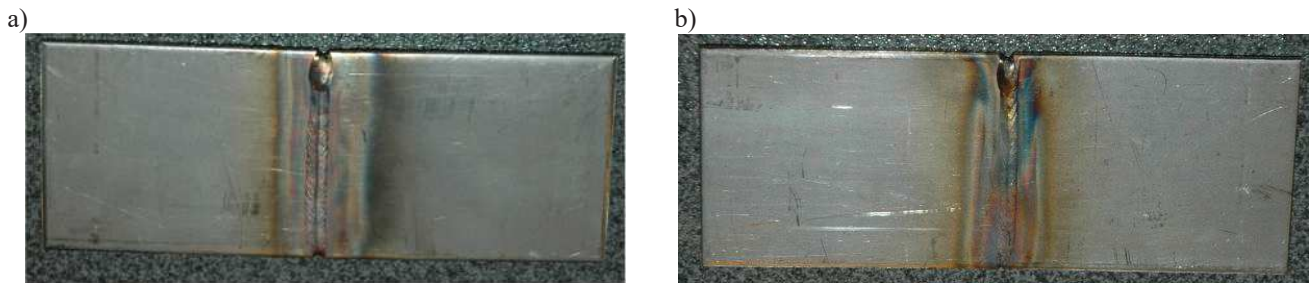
A view of the test butt joints A(3) of austenitic stainless steel AISI 304 sheets 2.0 mm welded by high power diode laser according to parameters given in Table 4; a) weld face, b) root surface
